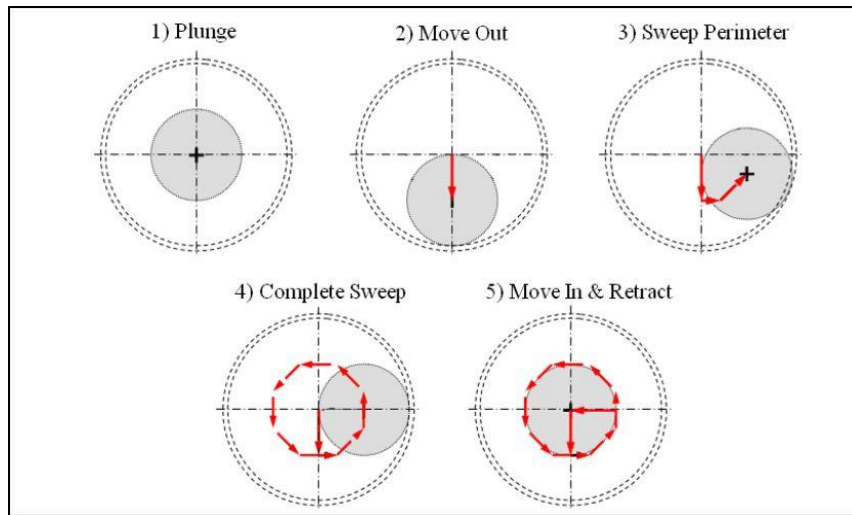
Schematic of swept friction stir spot welding [3].
